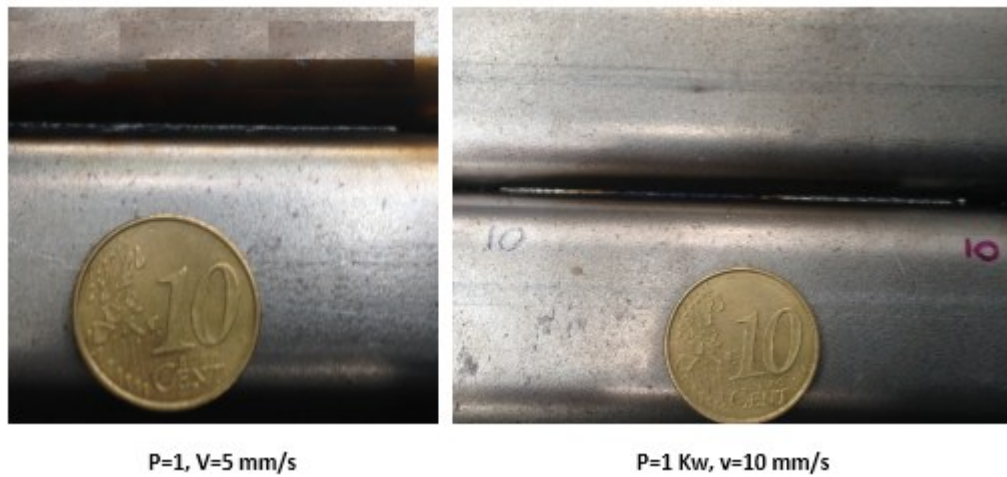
Proximity laser welding, spot dimension=0.1mm
